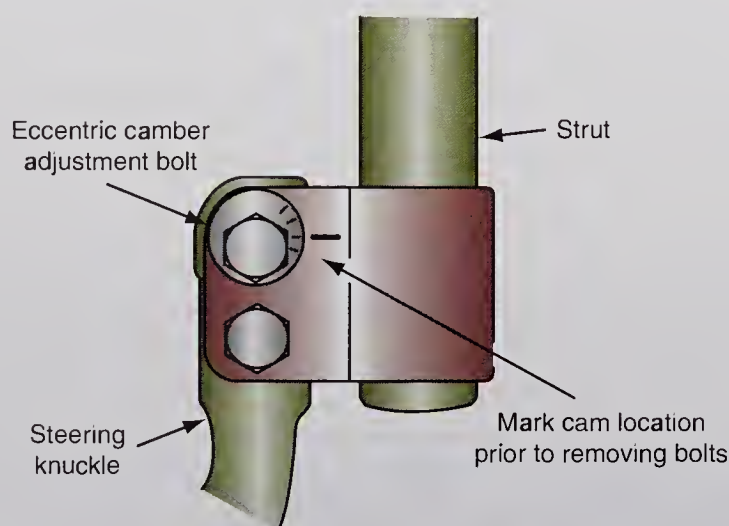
Eccentric steering knuckle-to-strut camber adjusting bolt, MacPherson strut front suspension.
